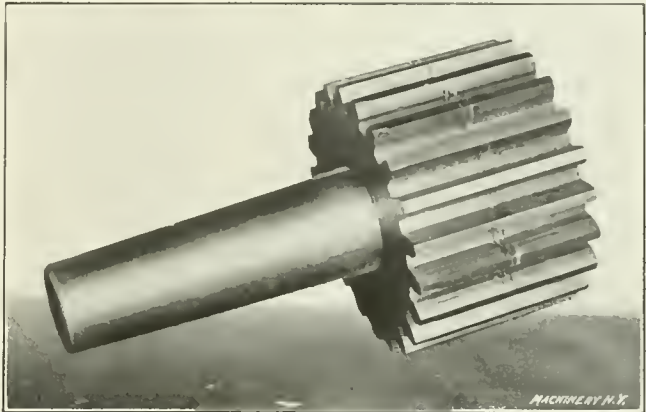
Arrangement of Blanks used for Experiments on the Hobbing Machine
